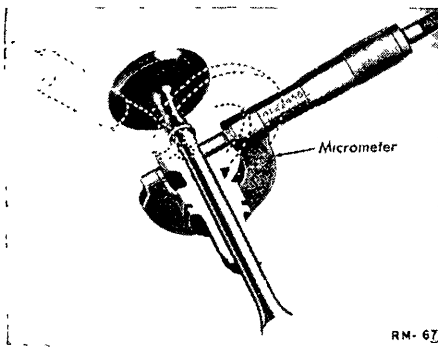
Checking valve guide for wear, 1935-48 Ford and Mercury V8 and 1936-48 Lincoln H
